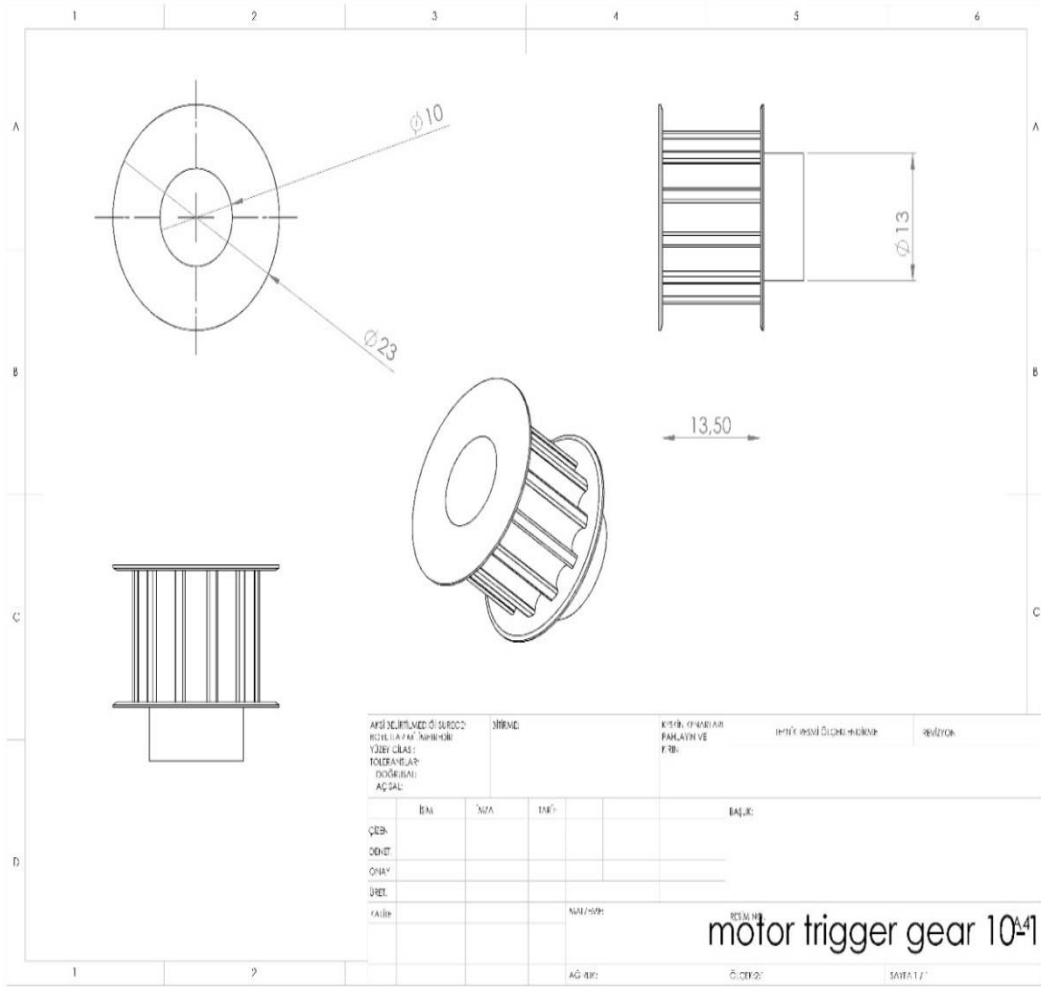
Figure Appendix A.11. Gear connected with stepper motor for all axes.
